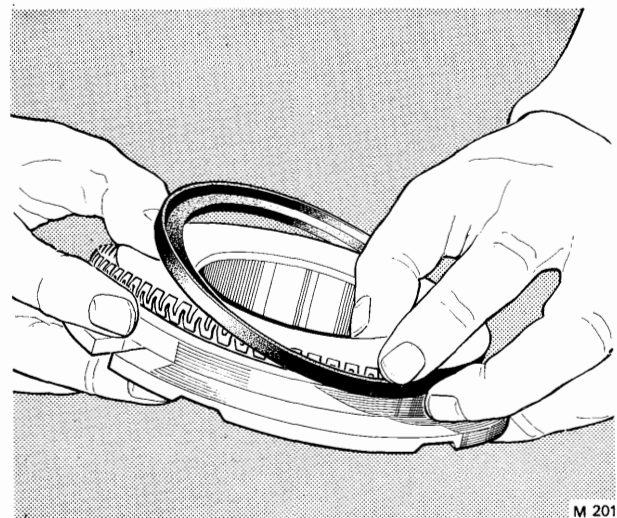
FITTING EXPANDER AND SEAL TO CLUTCH PISTON
